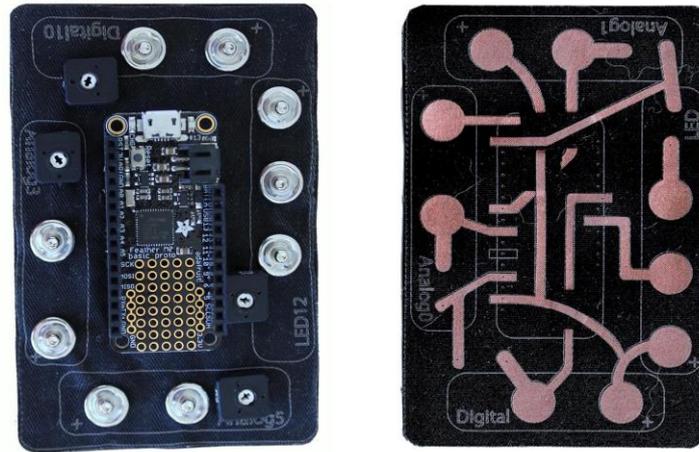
The appearance (left) and the inside circuit layout (right) of the PCB
